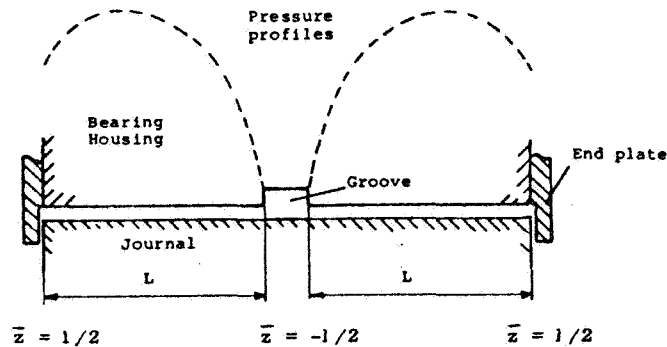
Damper configuration with circumferential oil supply groove and end plates
